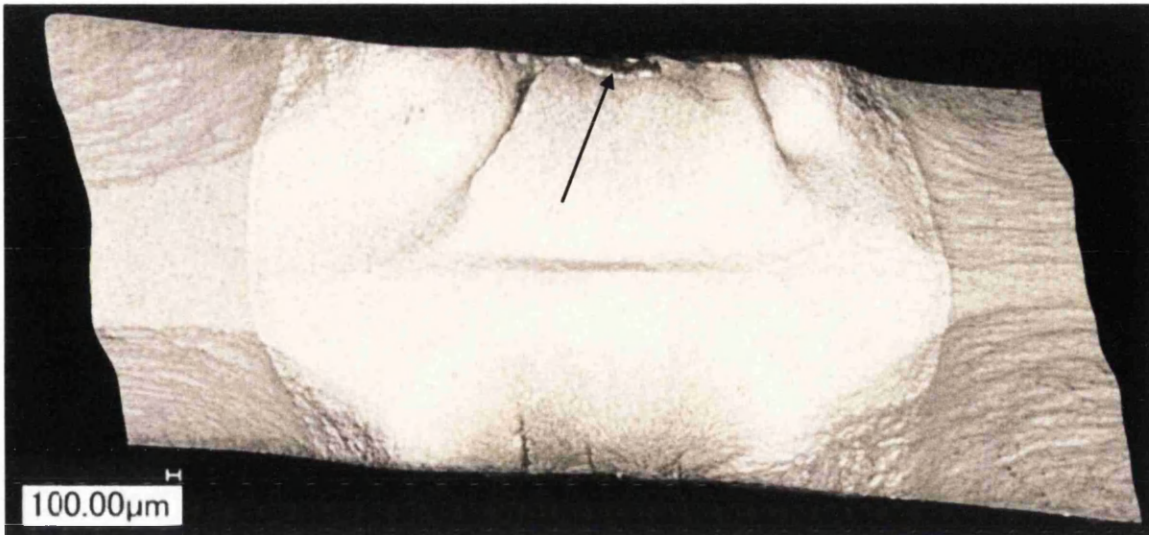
3D Birdseye view of fracture surface and fatigue origin shown by black arrow.
